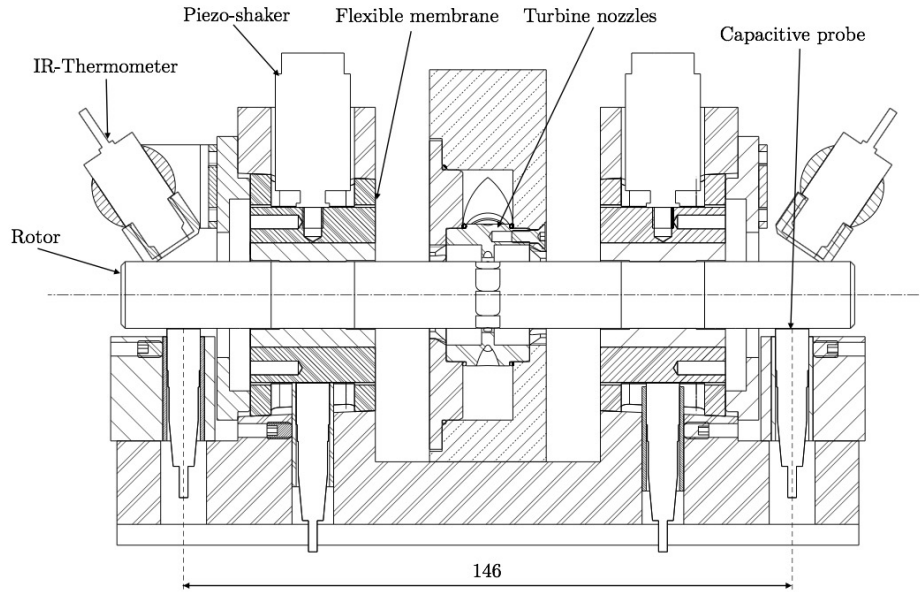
Cut-view of the experimental apparatus showing the main components : capacitive sensors, piezo-shakers, rotor, turbine. The axial bearings are not represented on this view
